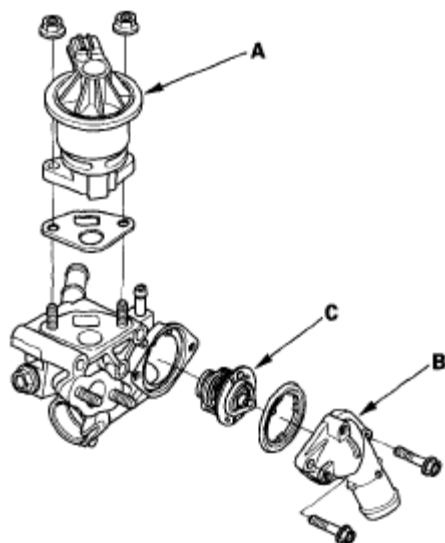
Identifying EGR Valve, Thermostat Cover And Thermostat
